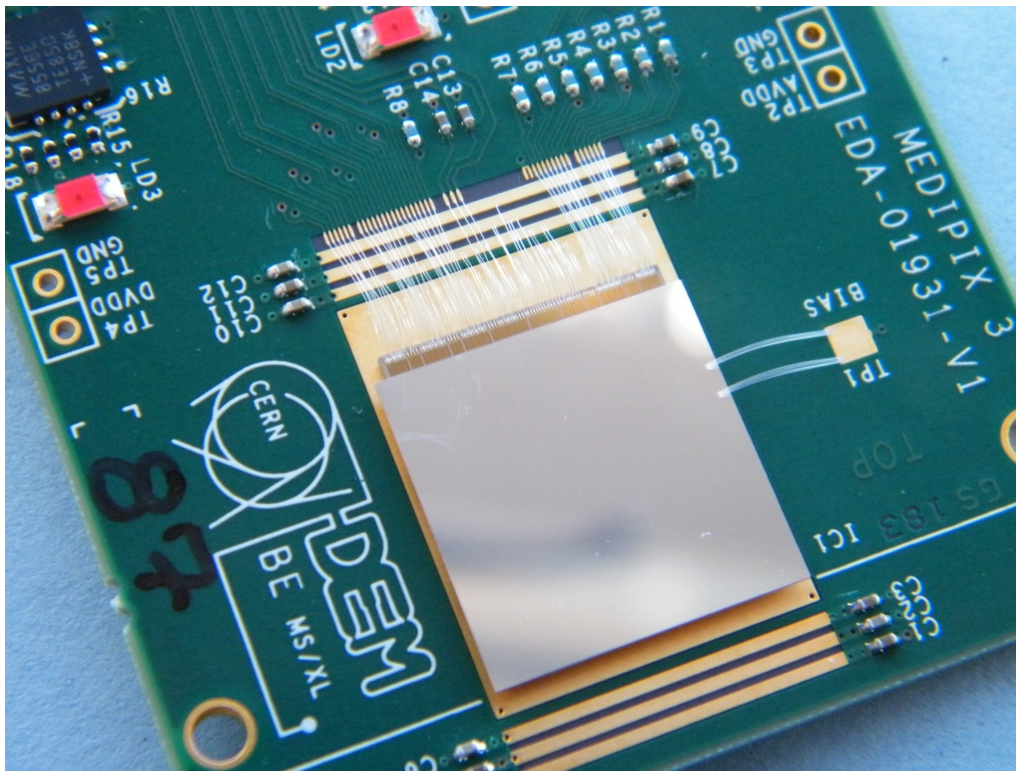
Photo of a Medipix3 chip mounted on the CERN chip carrier. The ASIC layer is just visible at the top edge of the square assembly where the wire bonds connect the lower chip to the printed circuit board. The high voltage bias supply is connected to the upper sensor layer on the right.
